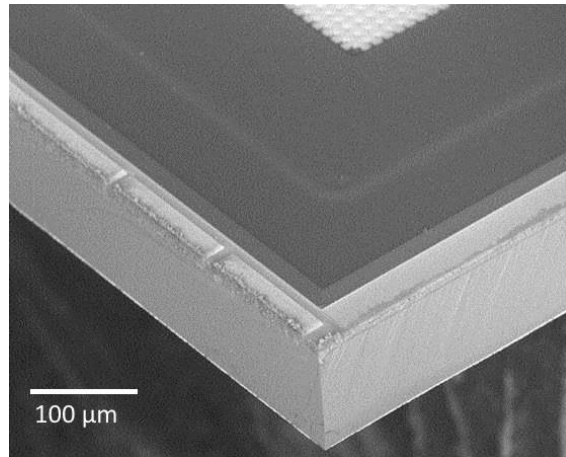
REM picture of SiC die edge after TLS-Dicing™ process shows smooth edges without micro cracks and chipping.
